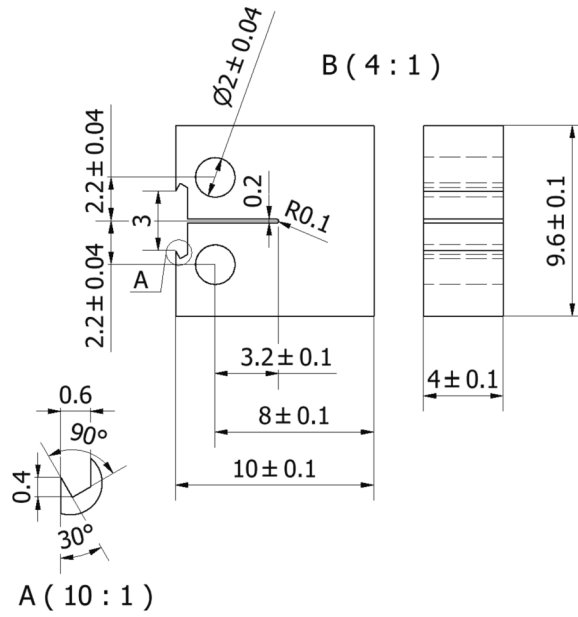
The geometry of the mini-C(T) specimens. Dimensions in mm.
